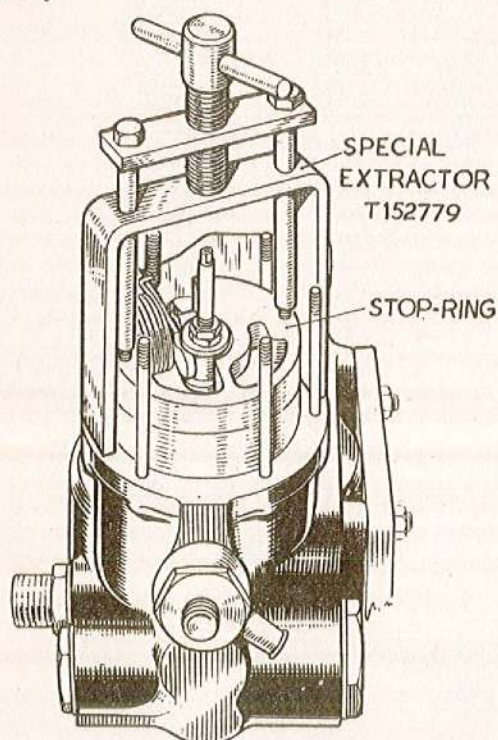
Use of special extractor T.152779 for withdrawing capsule stop-ring and canister assemblies
